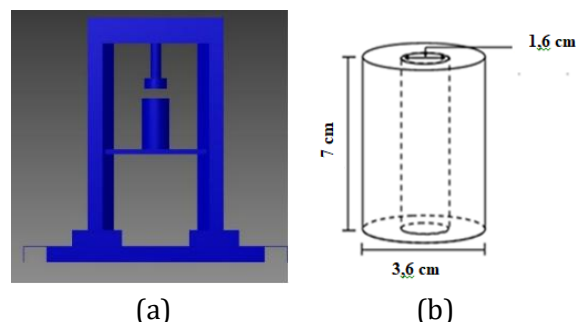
3D design of the briquette mold: (a) front view; (b) dimensions of the cylindrical hollow briquette
